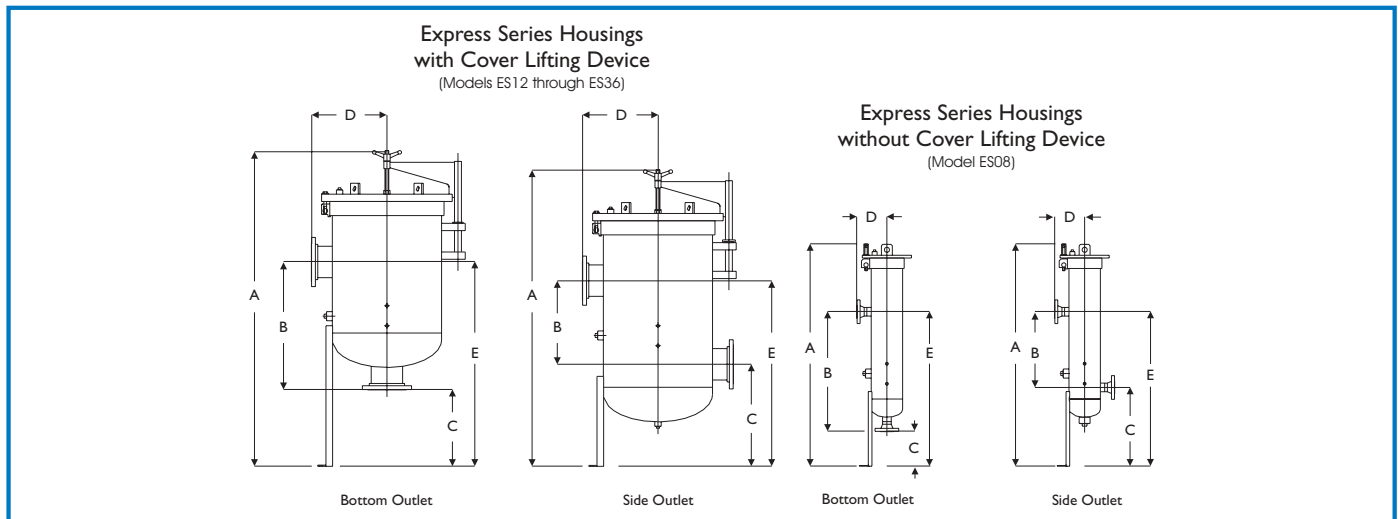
DIMENSIONS OF THE EXPRESS SERIES FILTER HOUSING
